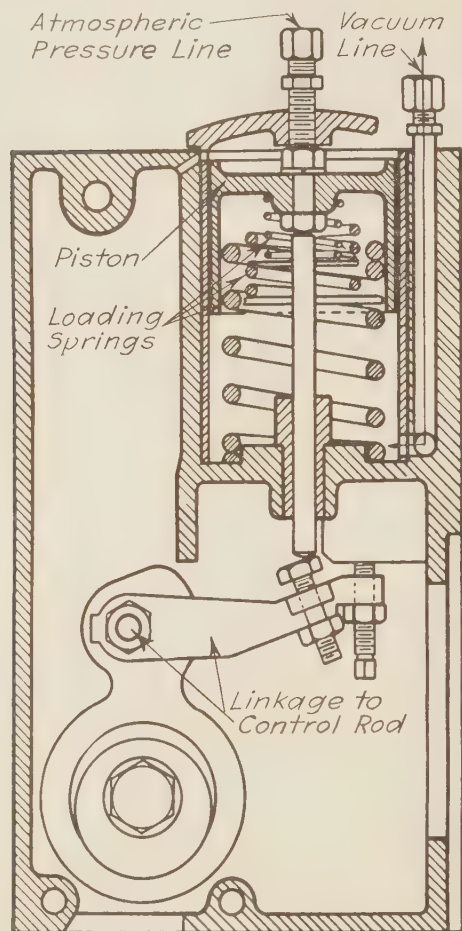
VACUUM CONTROL FOR THROTTLE-GOVERNING THE A-C OIL ENGINE
